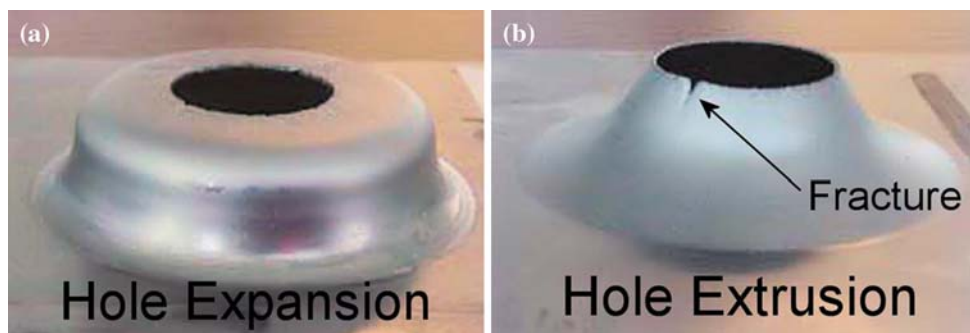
Representative specimens from (a) a hole expansion test with a flat bottom punch and (b) a hole extrusion test with a conical punch (Ref 1). The crack in the hole extrusion test is from a sample that was tested beyond failure
